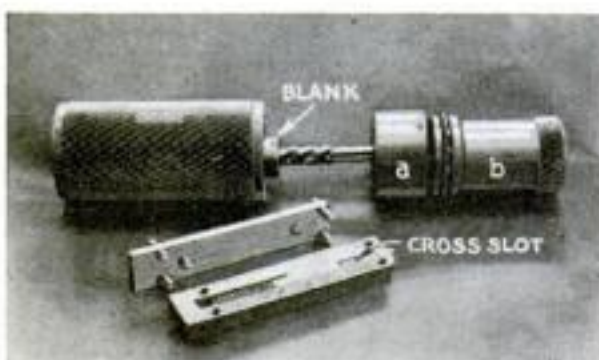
Fixture for broaching work on an arbor press, and a spring tool for making graduations.
